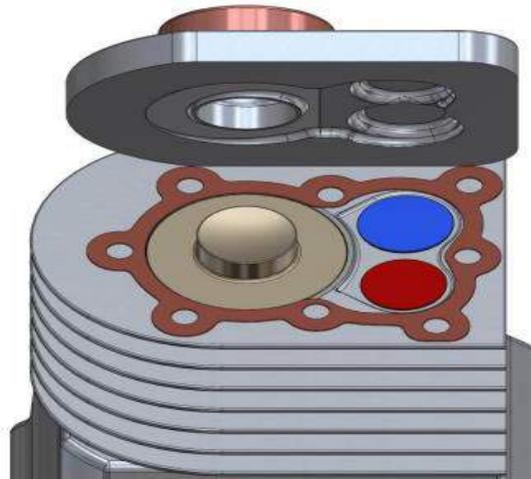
Cylinder head piston assembly of Nautilus GEN II engine. (Davani, 2019)
